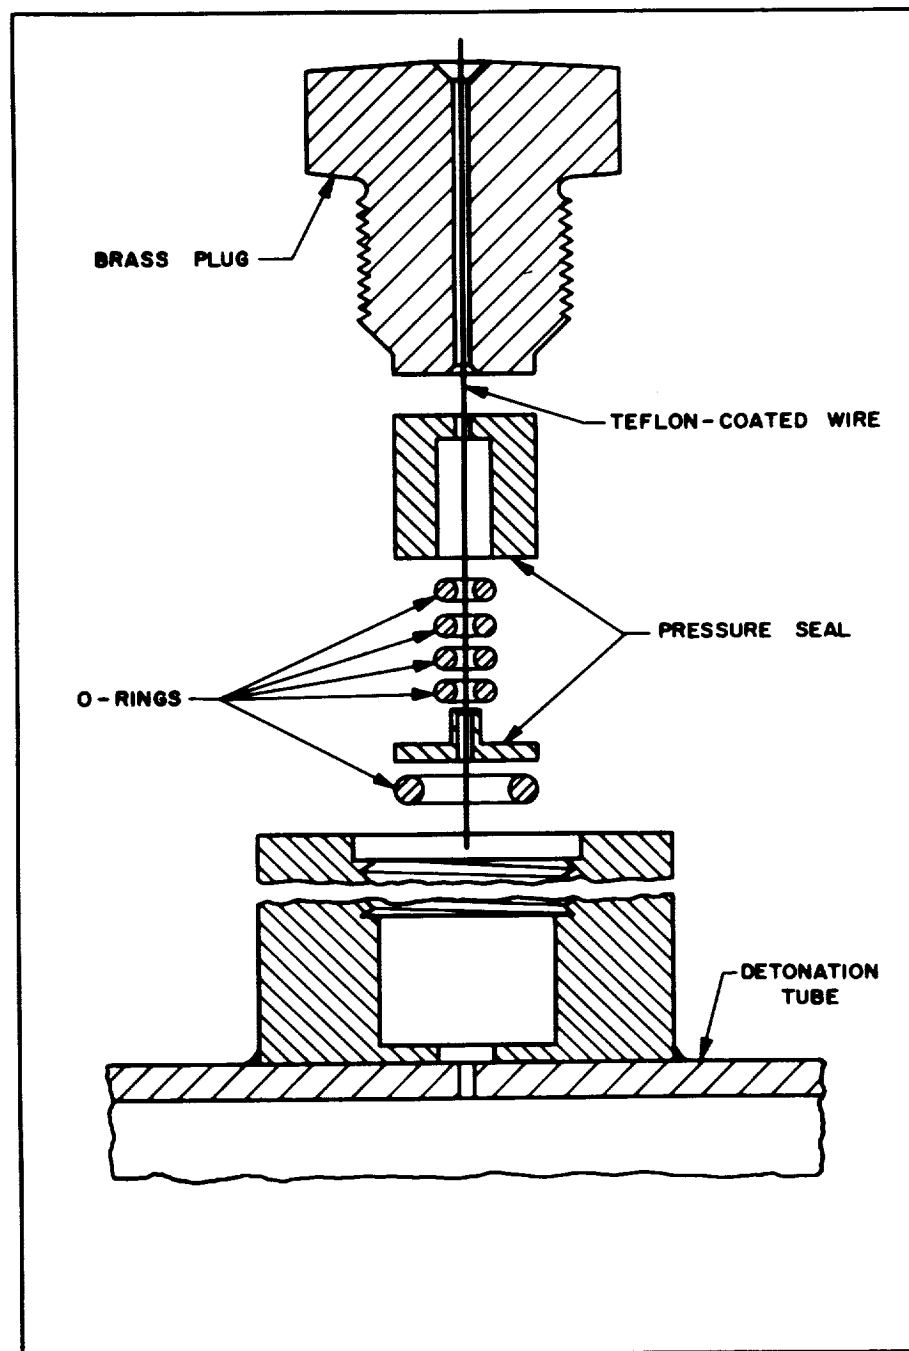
EXPLODED VIEW OF PROBE ASSEMBLY
